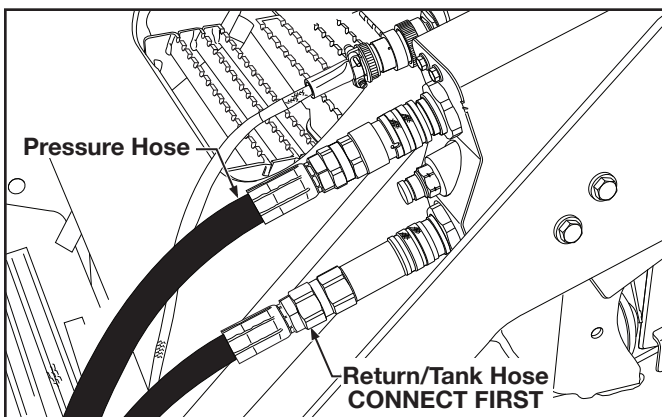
Hydraulic Hose Connections to Skid Steer
